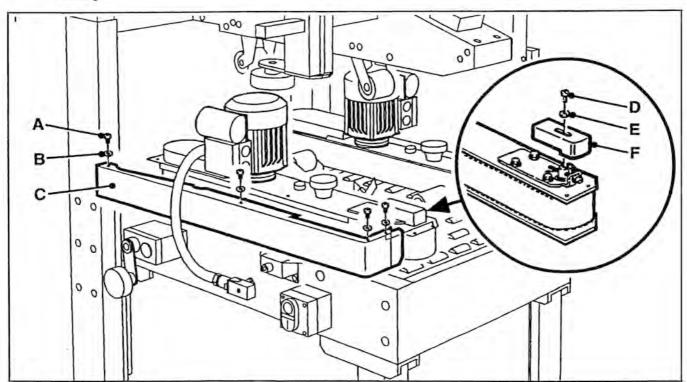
Box Drive Belt (Left Side View - Infeed End)
